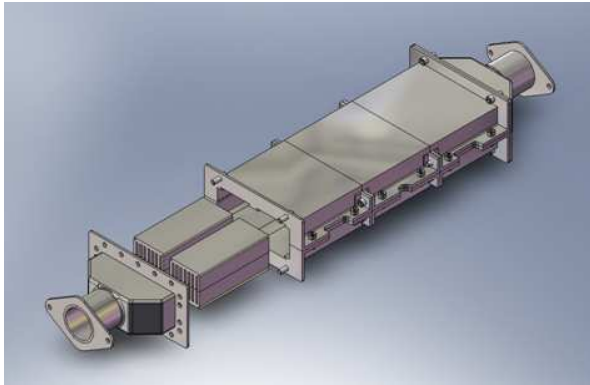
Segmented duct assembly with three zones (compression/cold plates are not shown)
